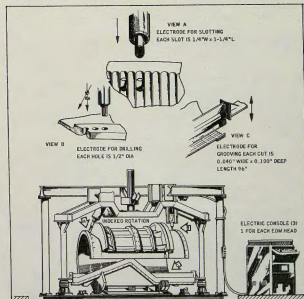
MULTI-HEAD ELECTRIC DISCHARGE MACHINING
